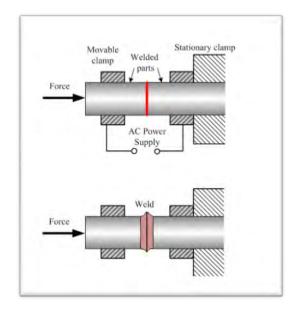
Resistance Butt Welding Process (Dmitri Kopeliovich, 2012)
